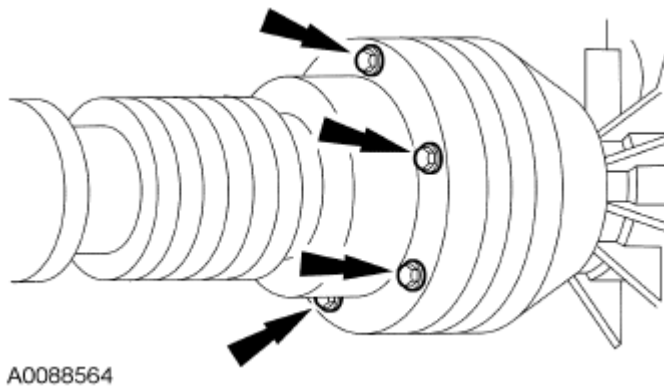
Locating Bolts Holding Driveshaft To PTU
